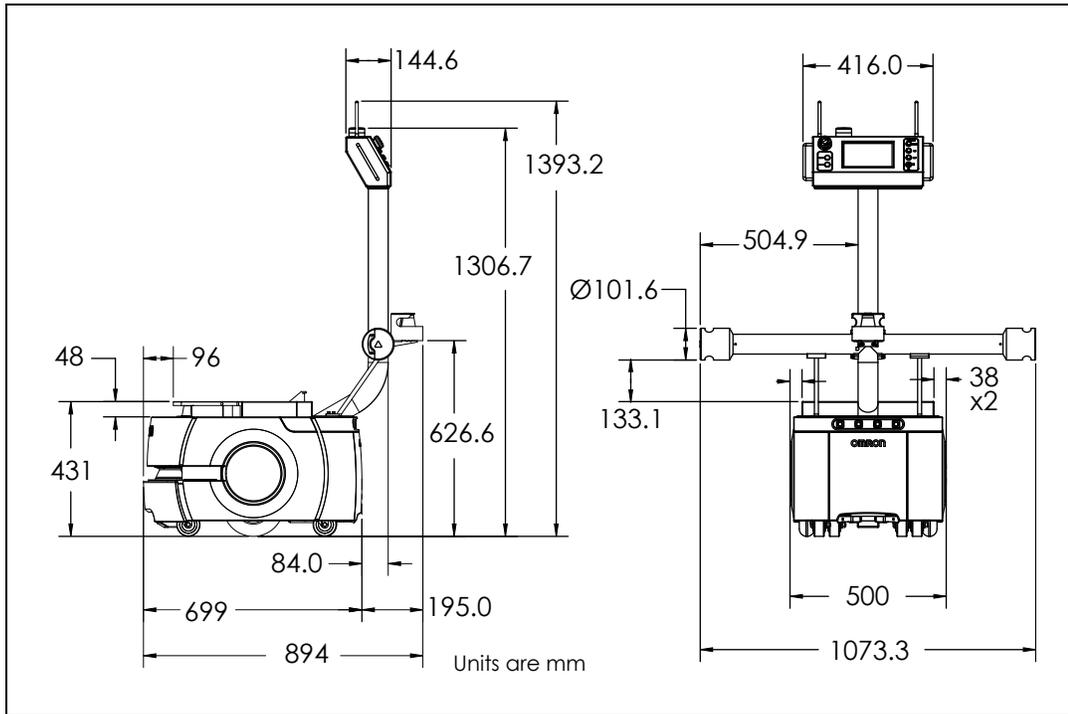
Overall LD Platform Cart Transporter Dimensions
